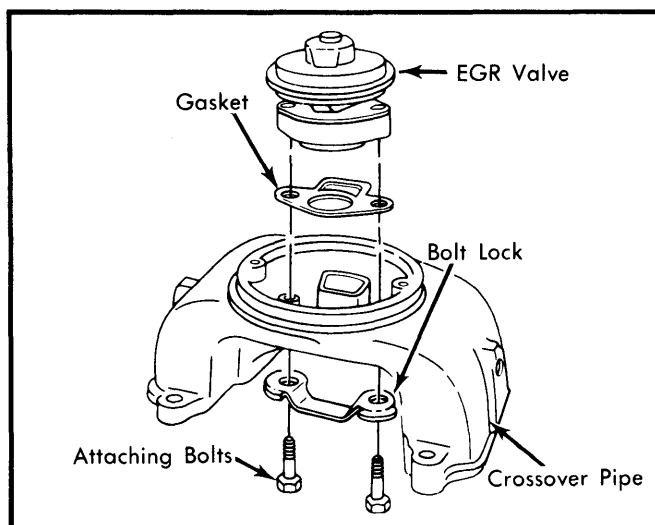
General Motors Diesel Engine EGR Valve (V8 & V6)
